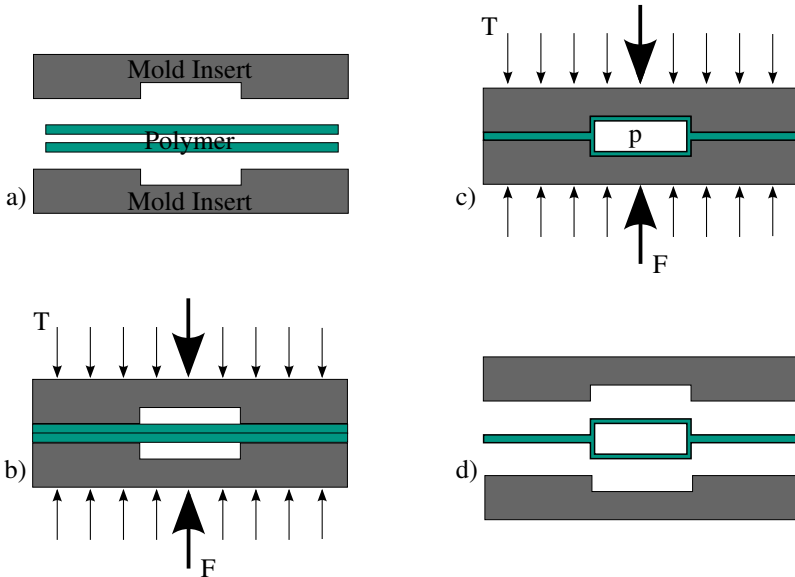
Schematic view of the twin-sheet-forming process. a) Two polymer foils are placed between to mold inserts. b) They are clamped and heated to the forming temperature. c) The mold inserts are evacuated while a gas pressure between the two foils is build up at a constant temperature d) During cooling the gas pressure is kept constant to avoid shrinkage or spring back. After reaching the demolding temperature the system is opened and the formed part can be demolded.
